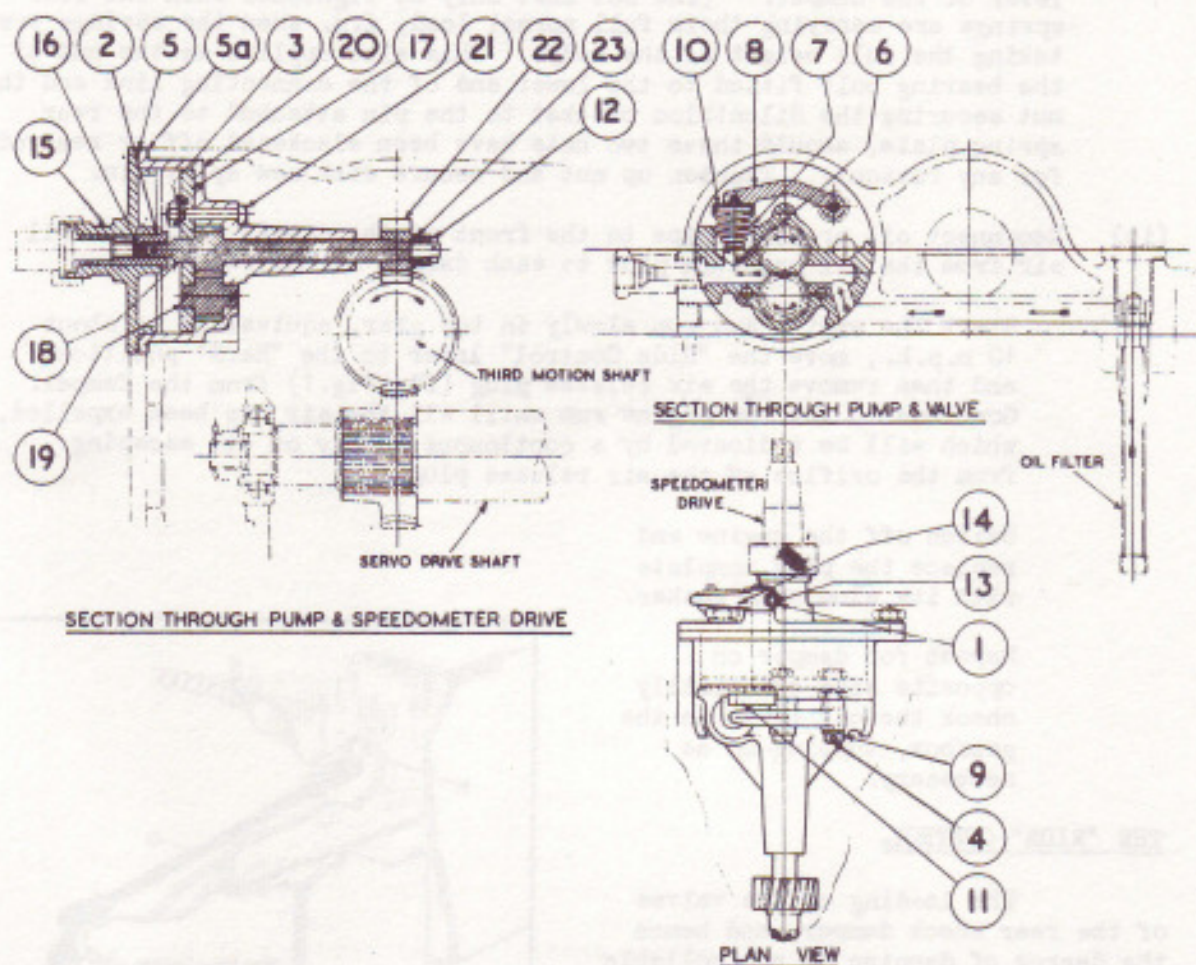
PUMP AND SPEEDOMETER DRIVE - SECTIONAL VIEWS.
